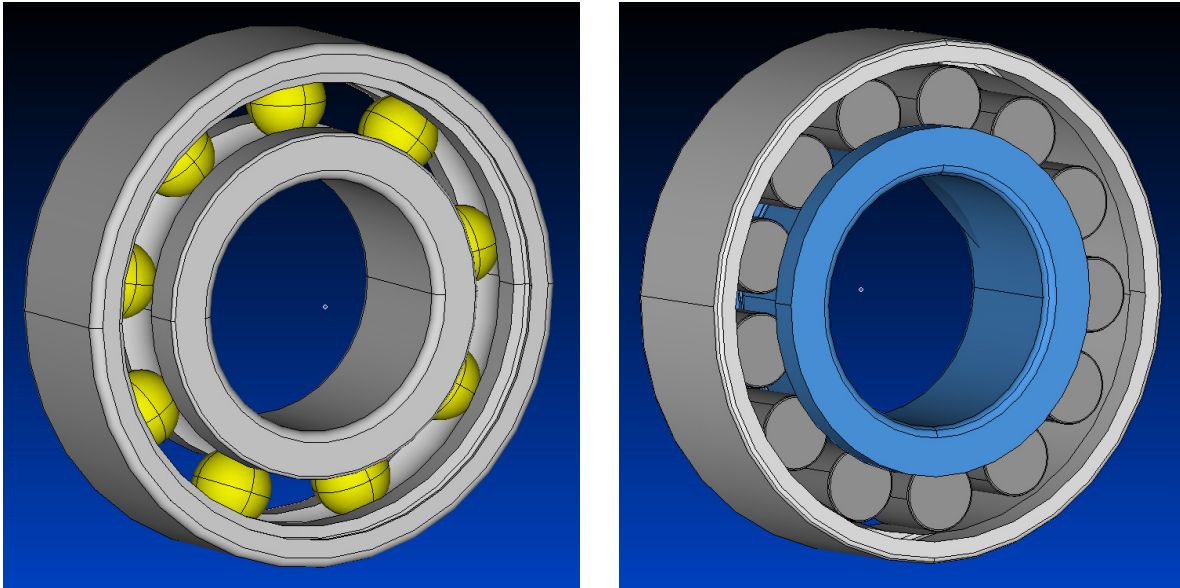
SKF Explorer 6205 Ball Bearing (left) and FAG N205E roller bearing (right).
